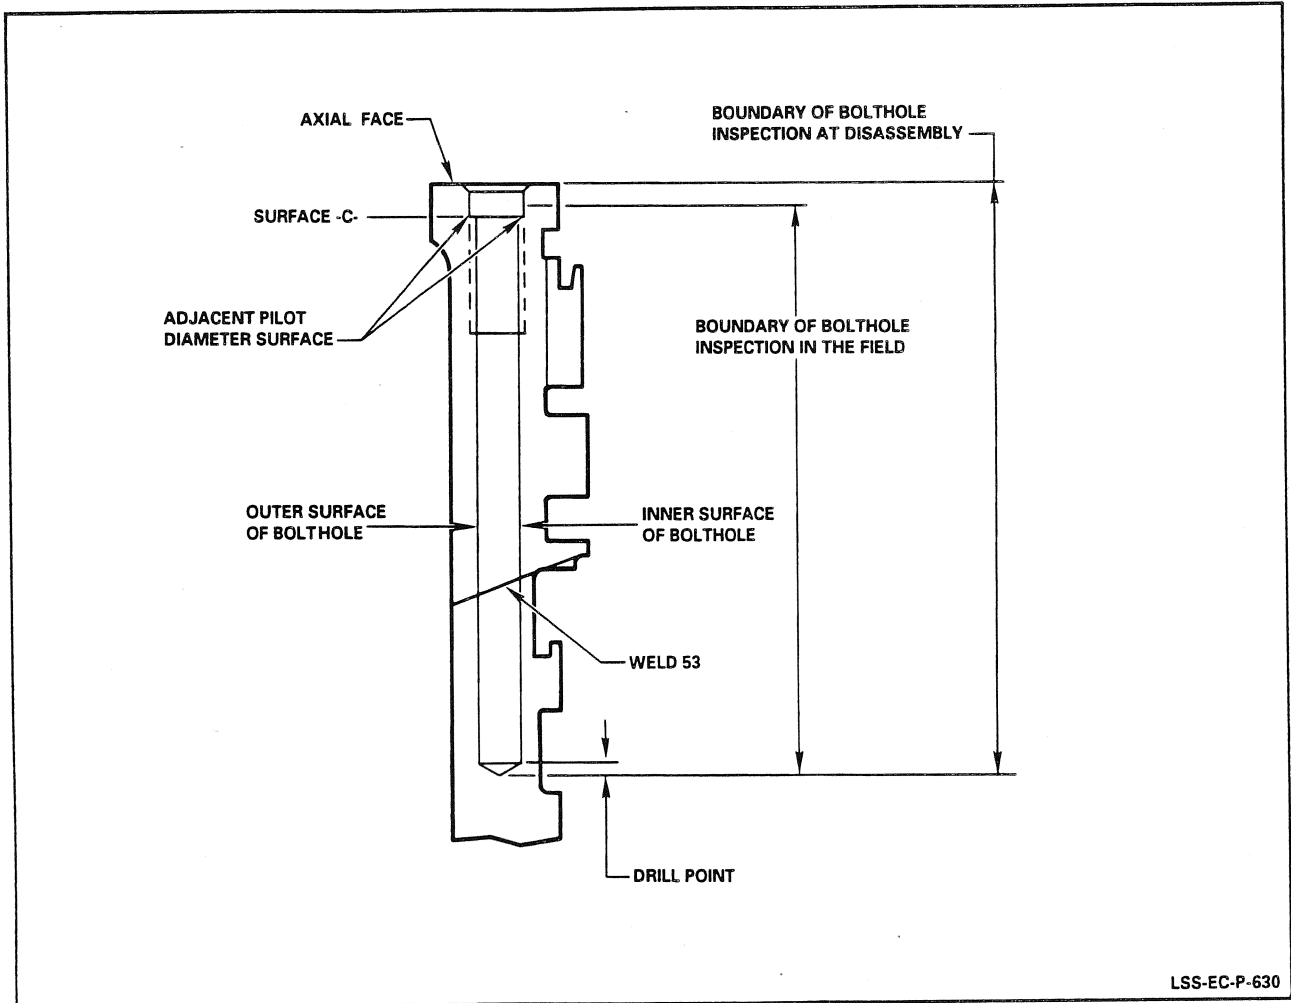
Cracks - Turbine Inner Ring Boltholes
